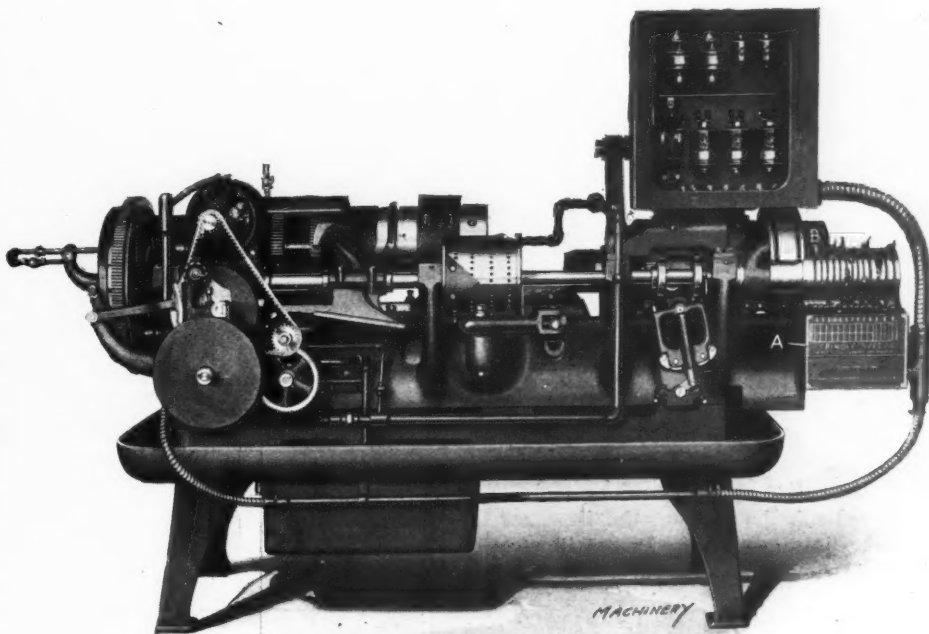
Opposite Side of Machine, showing Arrangement of Automatic Speed Control
